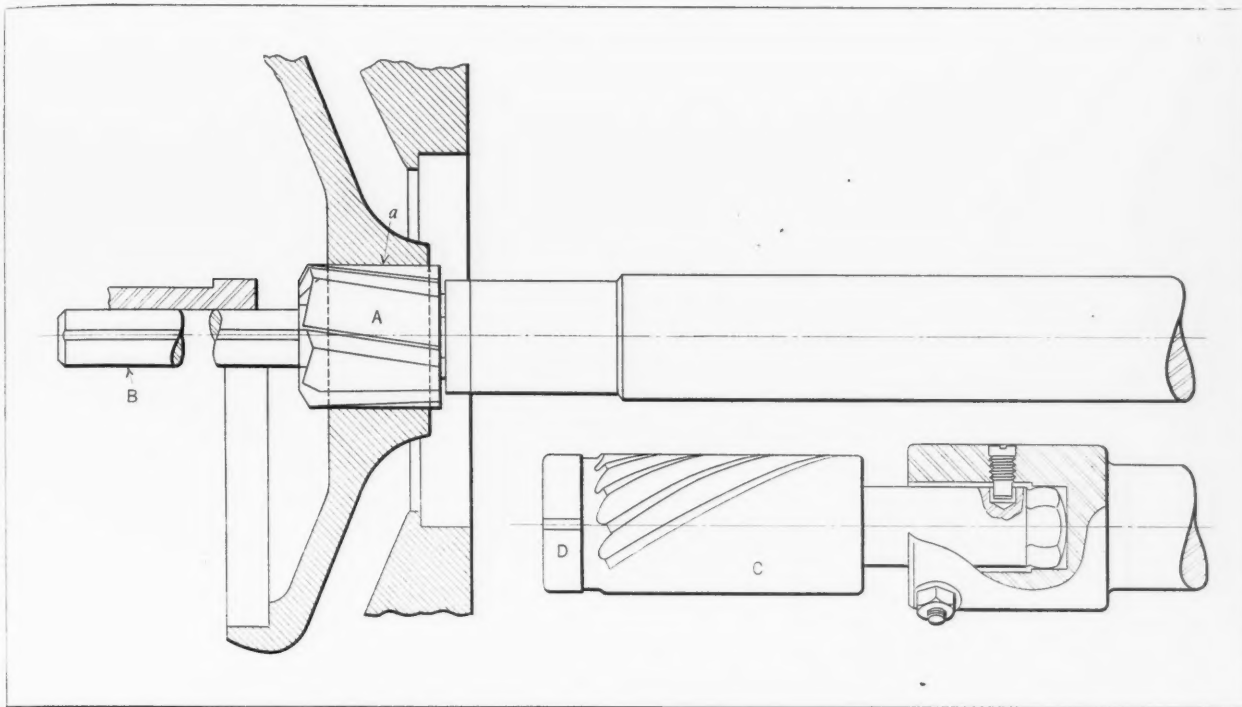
Tools Employed for Boring and Reaming Hole *a*, Fig. 1, of the Pump Bowl
